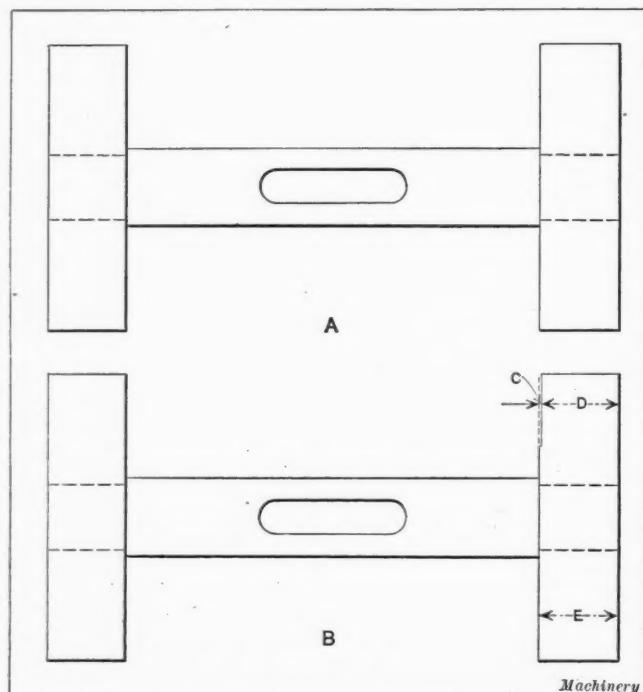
(A) Limit Plug Gage for Large Work. (B) Combined Plug and Depth Limit Gage
